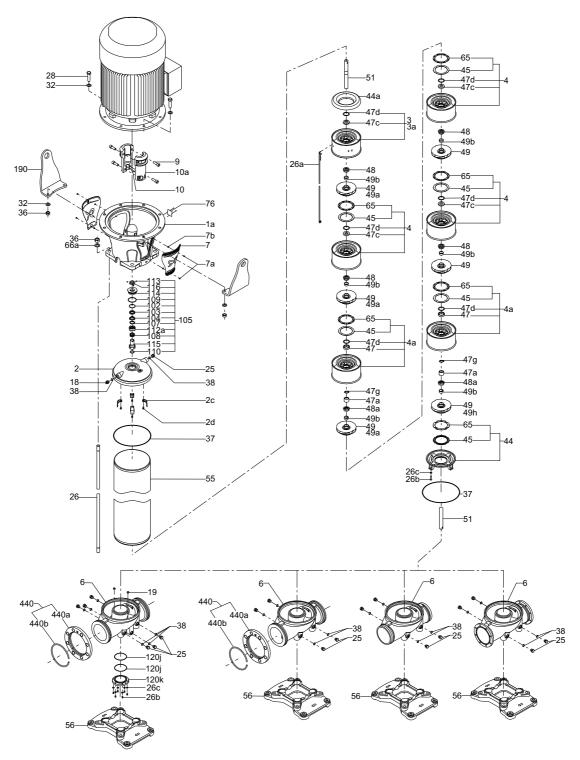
Exploded view of CR, CRN pump with Ø28 or Ø36 shaft and without thrust-handling device
